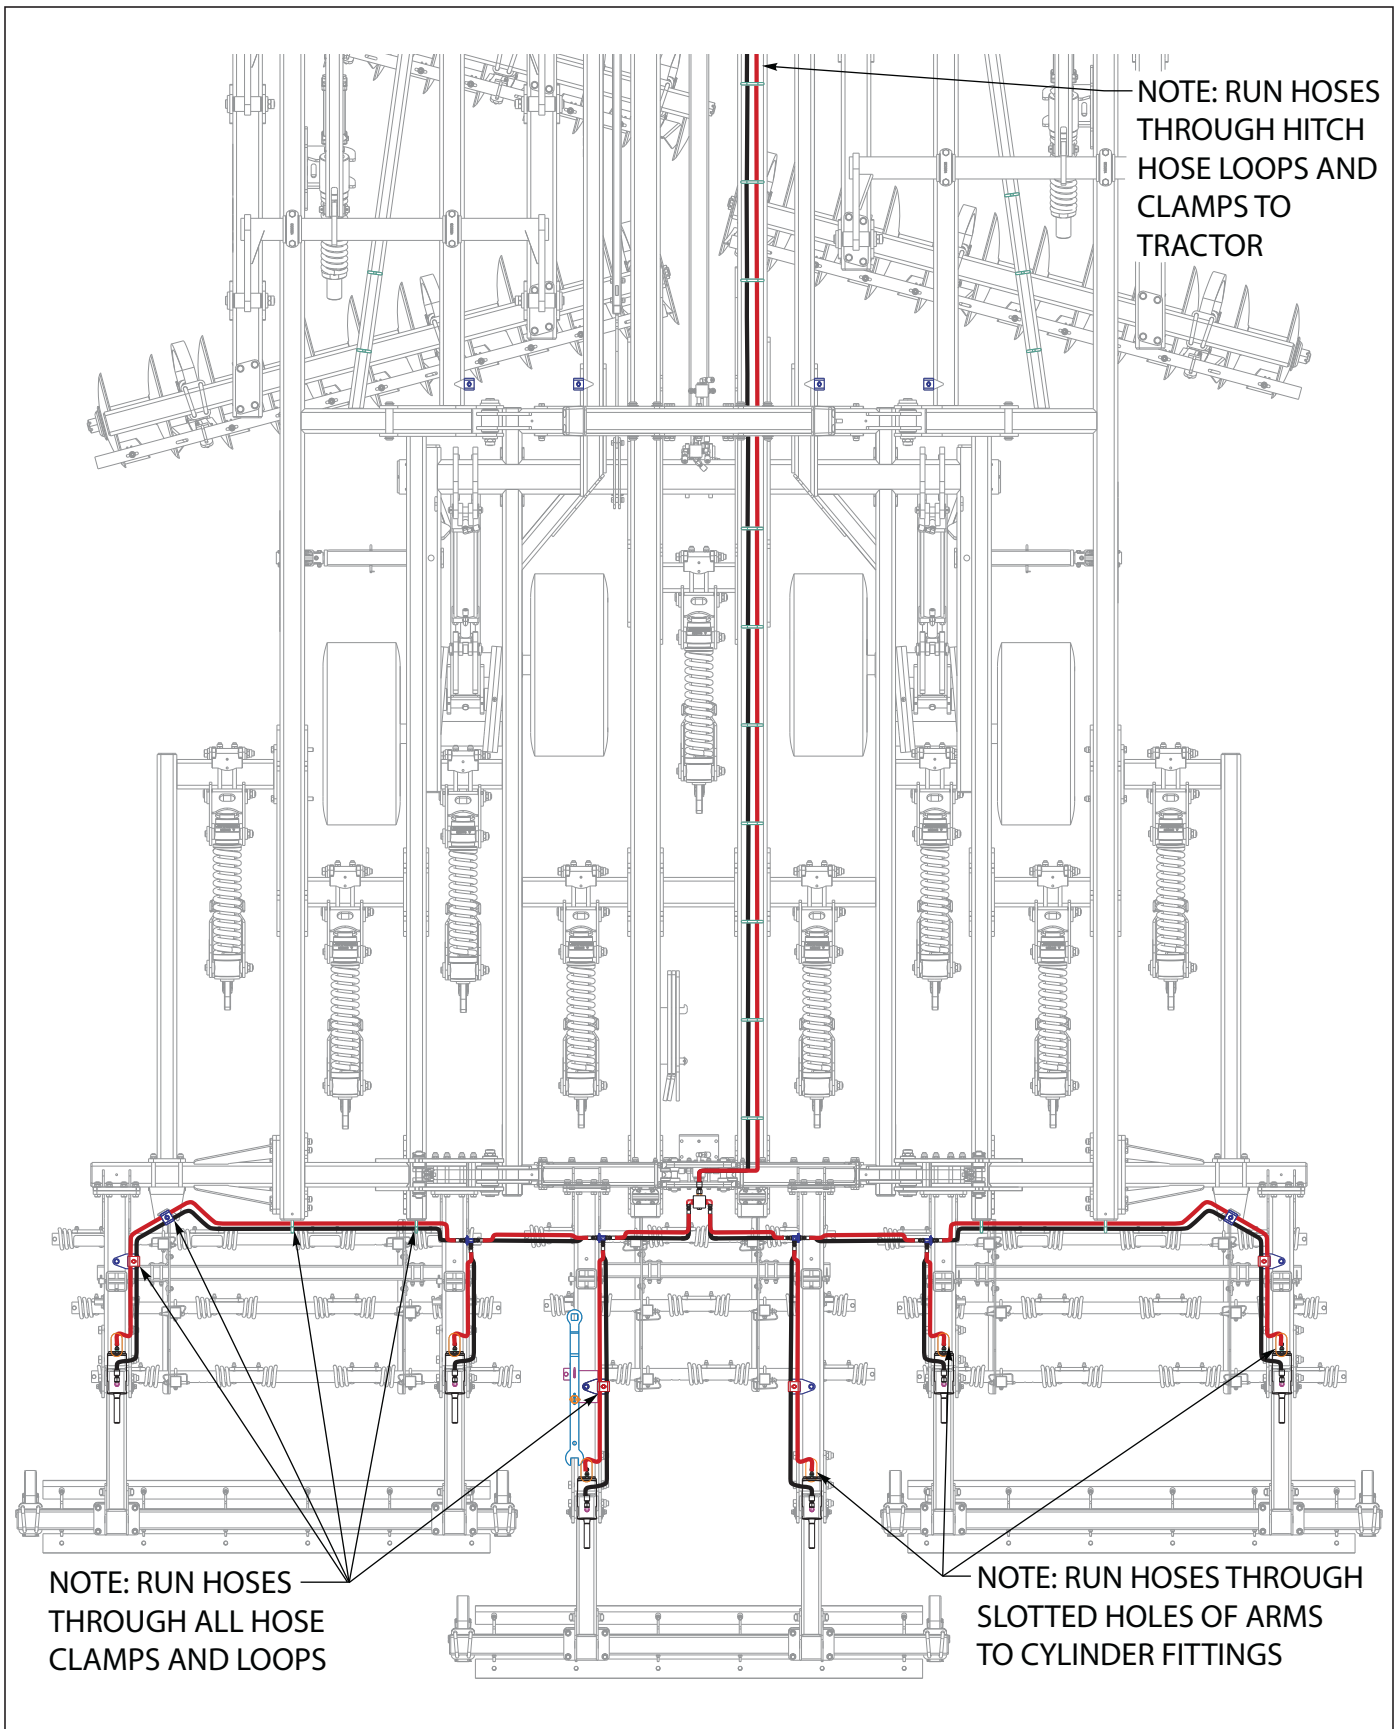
3BCT/Chopper Hydraulic Layout 2411AFG-07-09
